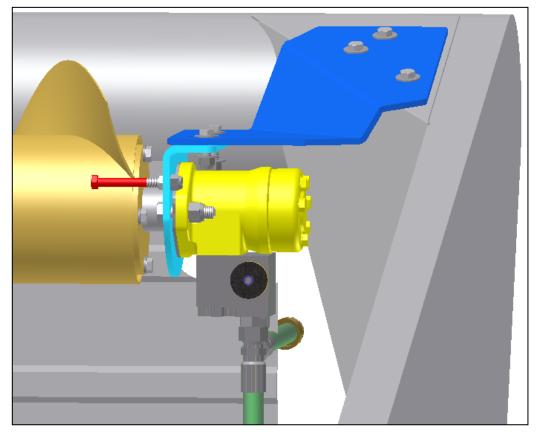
LH END FRONT VIEW MACDON D50 - 60 KIT'S # 405865, 405866, 405867
